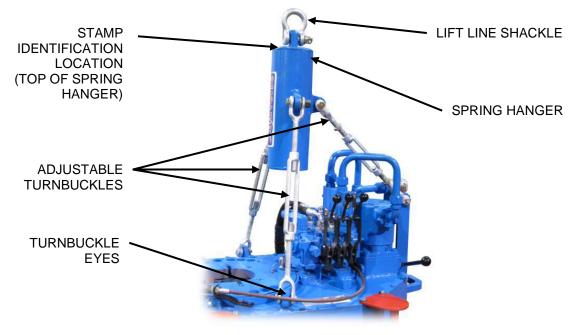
TONG SUPPORT ASSEMBLY
